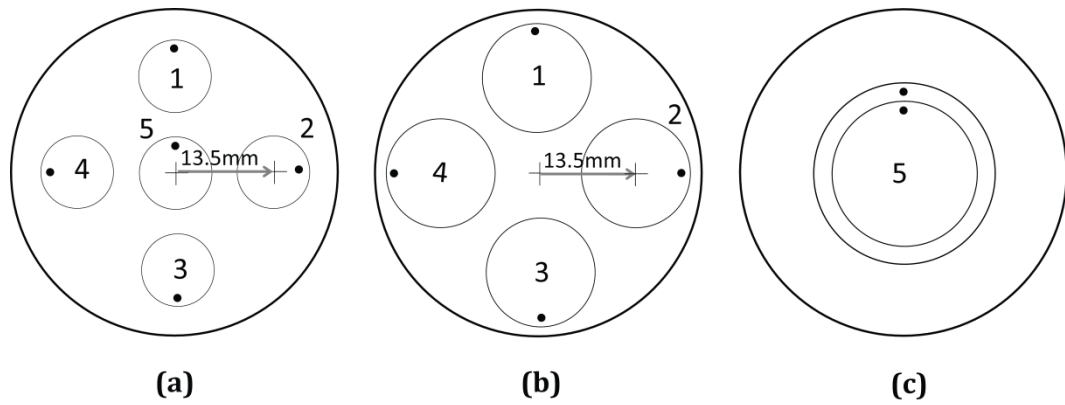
Machining positions for (a) 10mm, (b) 15mm, (c) 20 and 25mm diameter cylinders
